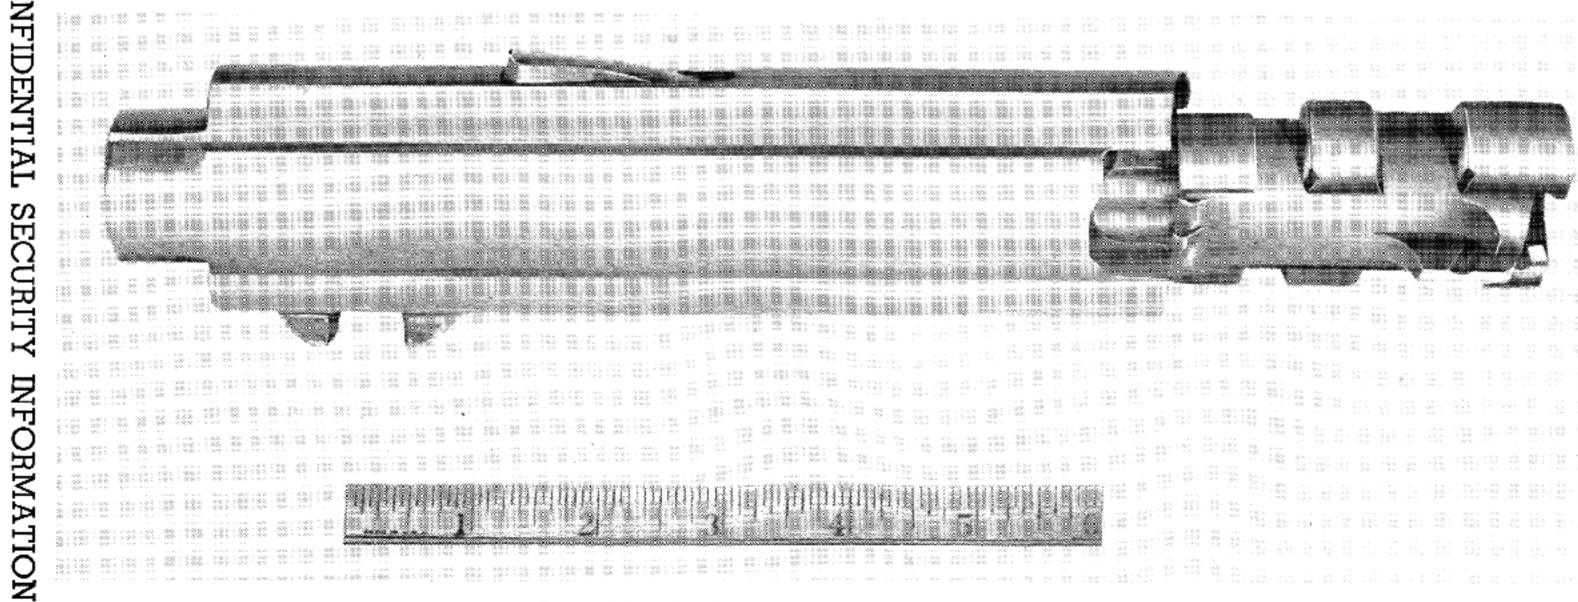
Another view of bolt assembly for 23-mm NS Gun.
